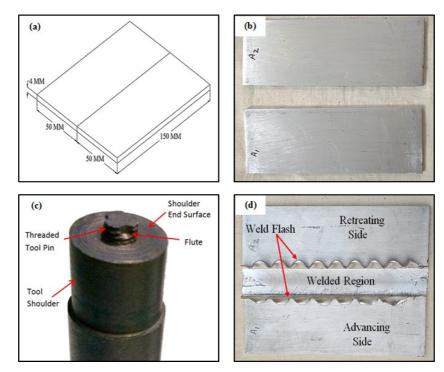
(a) A schematic diagram with plate dimensions used in FSW, (b) Mg alloy plates used for preparing joint, (c) tri-fluted FSW Tool, (d) joint prepared using FSW technique.
